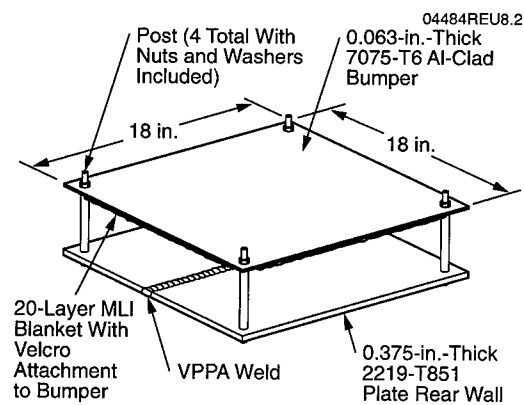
Phase I test specimen (weld region configuration).
